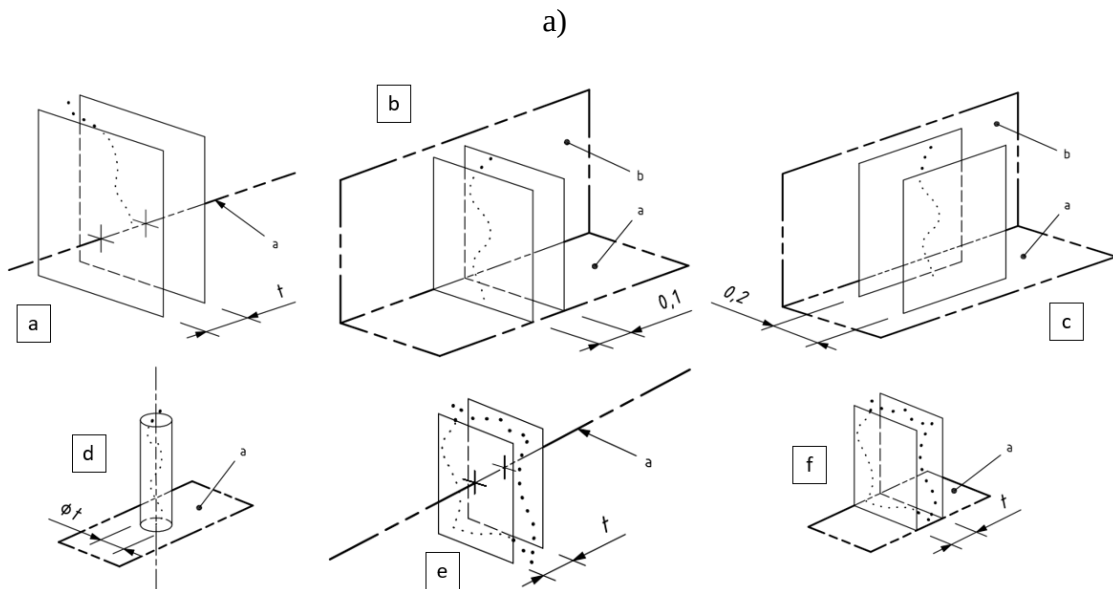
a) - Perpendicularity tolerance of a line related to a datum line; b) and c) - Perpendicularity tolerance of a line related to a datum system; d) - Perpendicularity tolerance of a line related to a datum plane; e) - Perpendicularity tolerance of a surface related to a datum line; f) - Perpendicularity tolerance of a surface related to a datum plane (extracted from [62])
